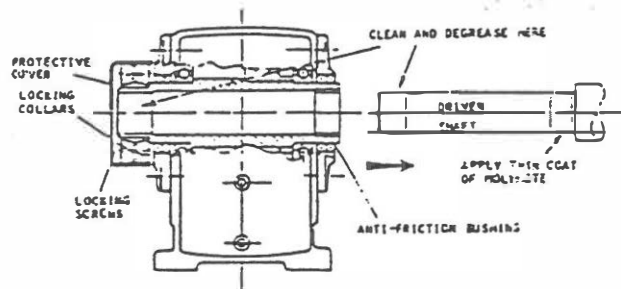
Mounting of Shrink-Fit Hollow Shaft Units
